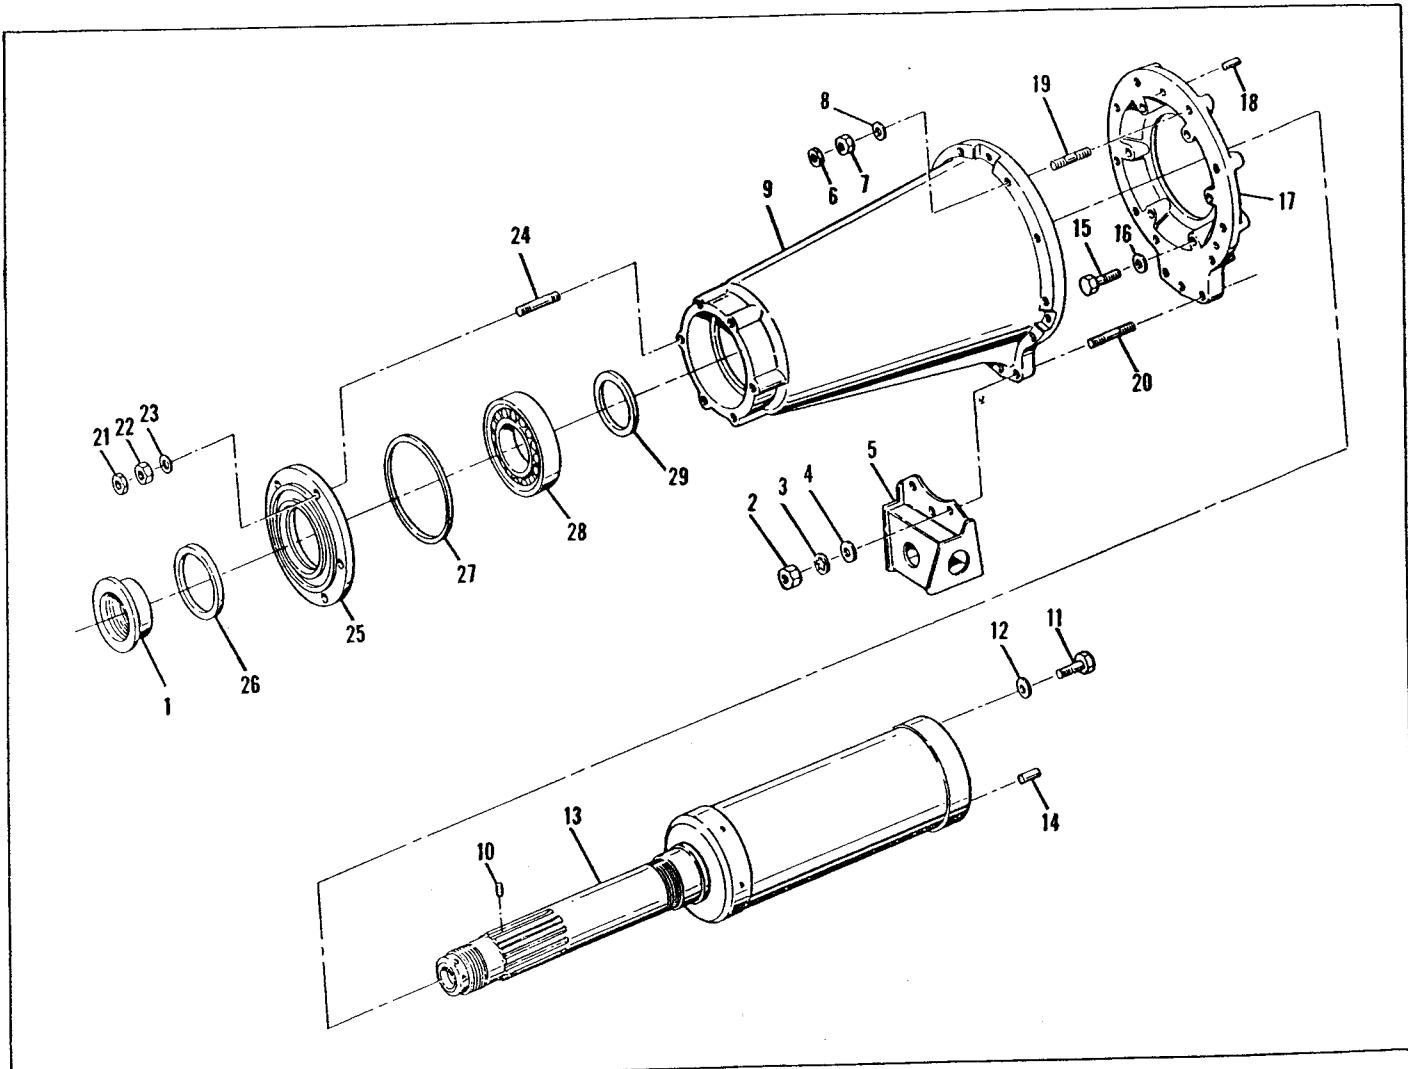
Crankcase and Crankshaft Extension Assemblies.
